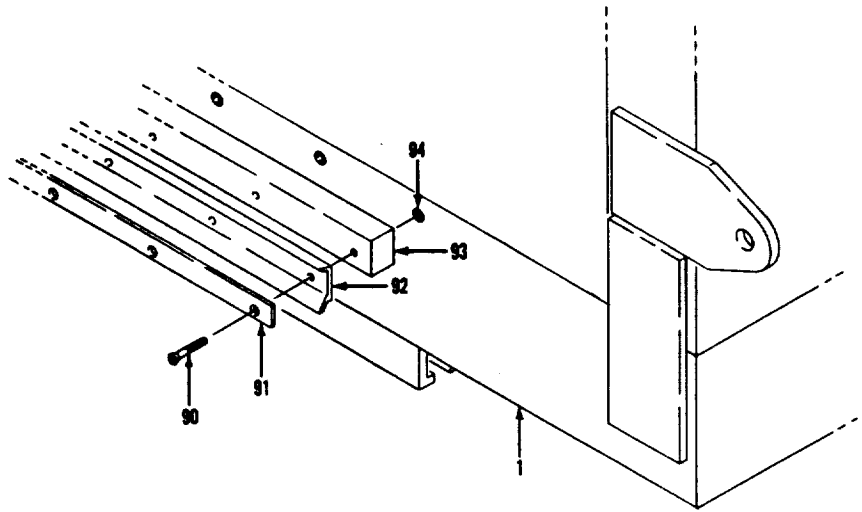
Extension Platform Assembly (Sheet 7 of 13)
